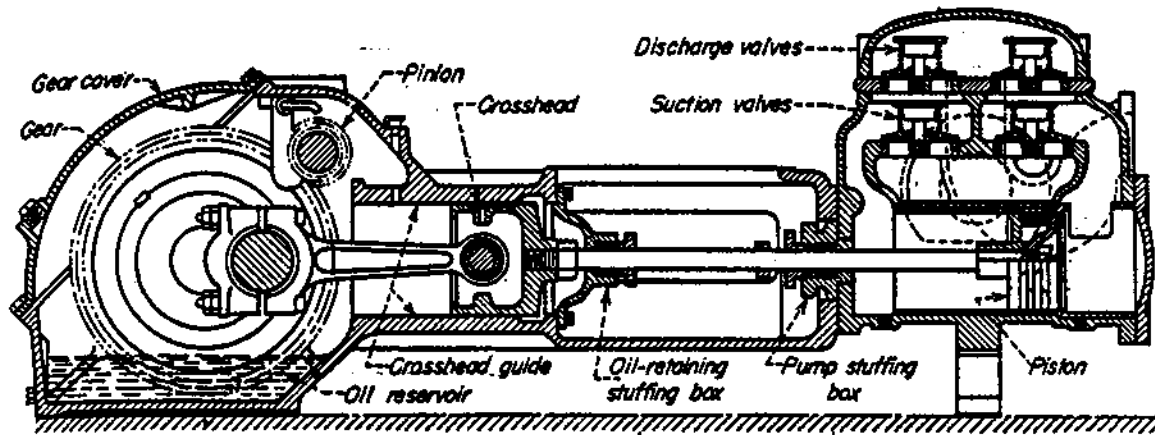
Cross section through horizontal duplex cap and valve-plate power pump.
